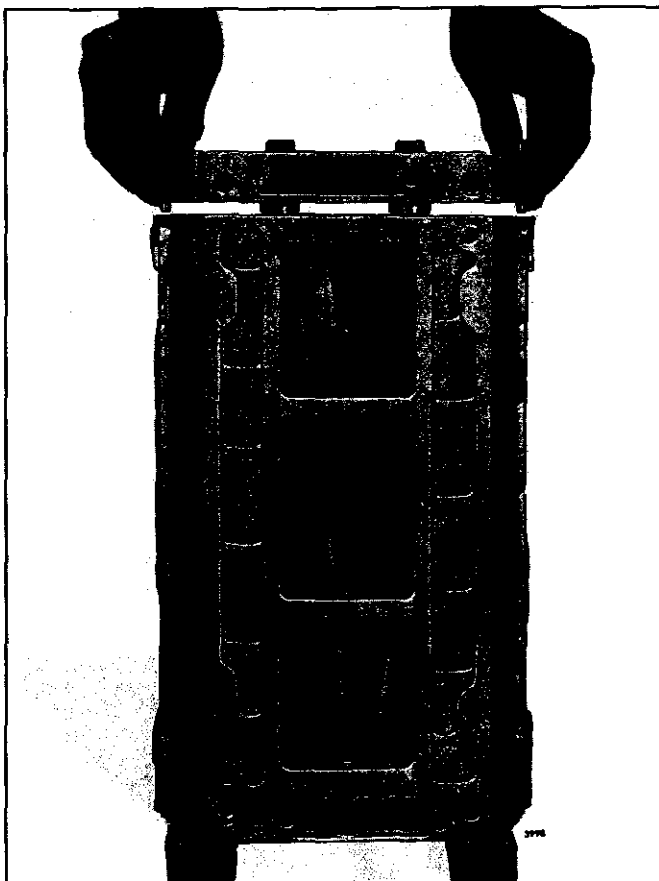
Installing Rear End Plate on Blower Rotors and Housing
